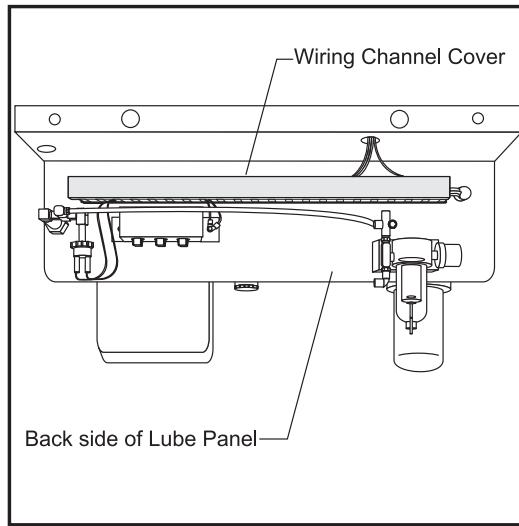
Top view of spindle lube/air solenoid assembly.
